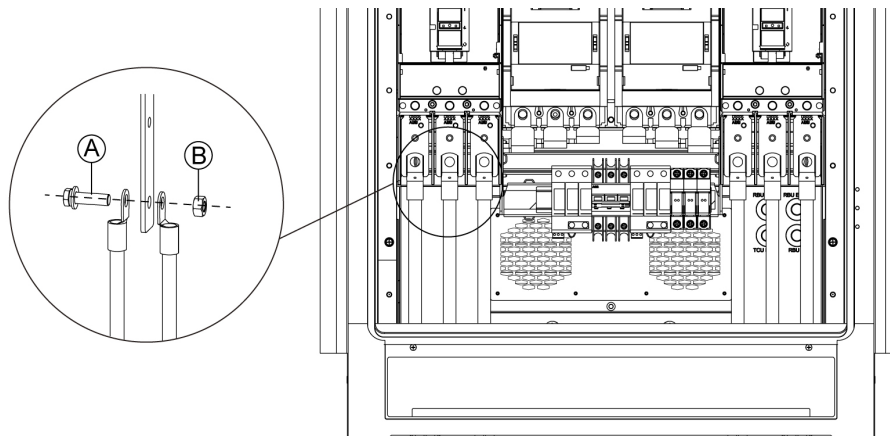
Connecting the AC Input Wires (Parallel Cables)
